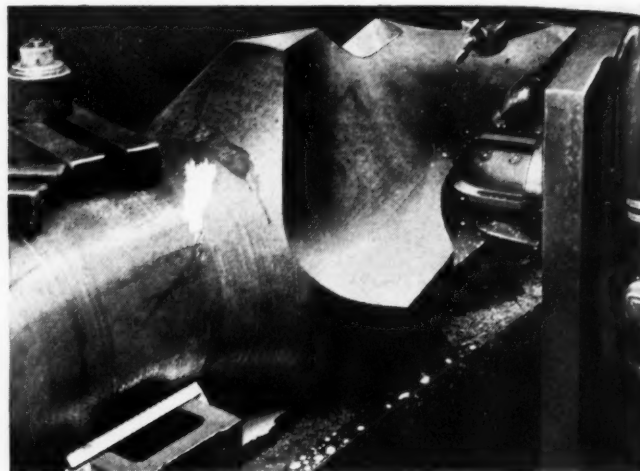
Milling the Blade Seats in Huge Oil-well Reamers with a Half-round Spherical Cutter on a High-power Milling Machine
